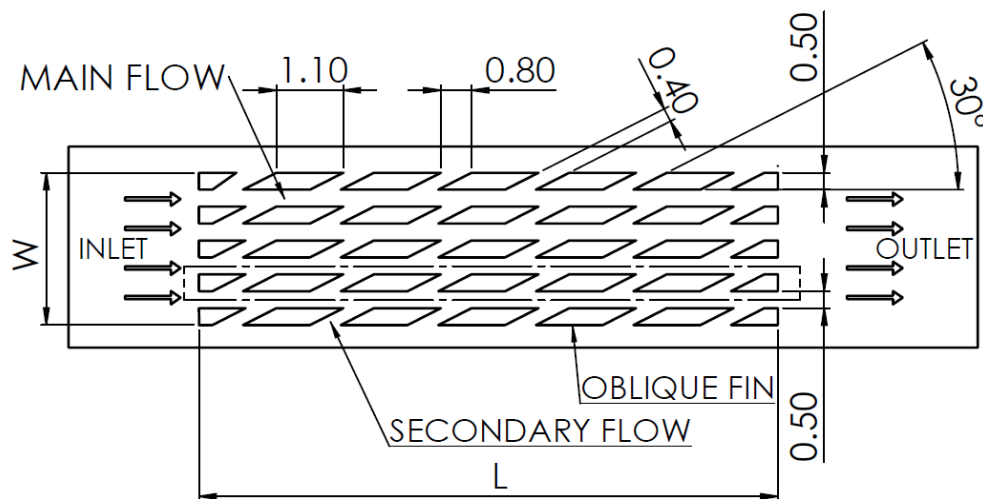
Plan view of Oblique fin Micro Channels with dimensions in mm
